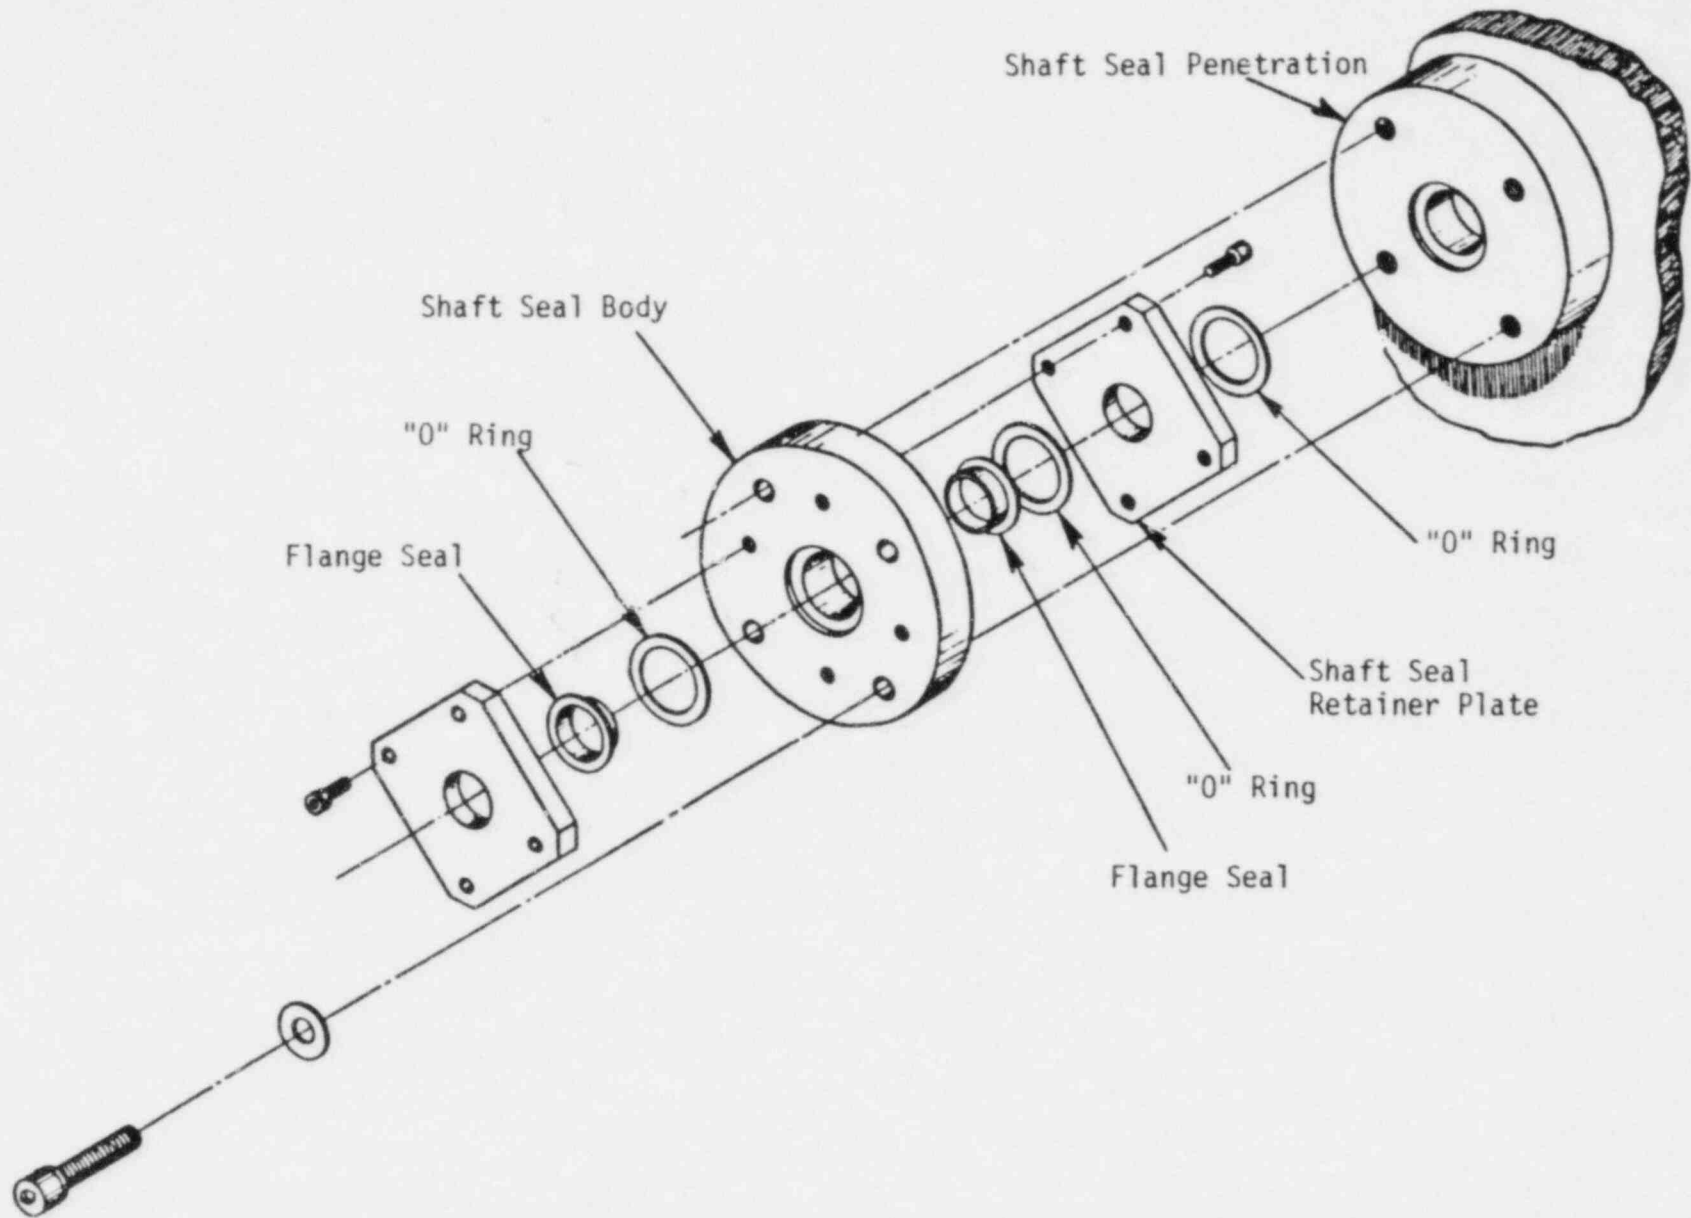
Containment (Airlock) Penetration Design for a Rotating Shaft.
